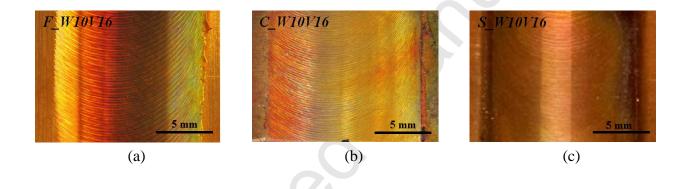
Surface appearance of the F\_W10V16 (a), C\_W10V16 (b) and S\_W10V16 (c) welds.
